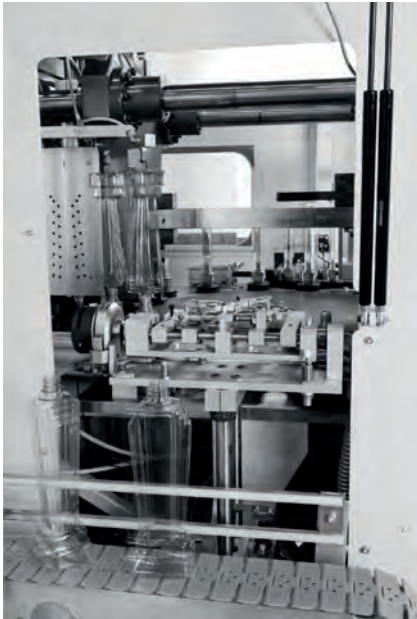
One electric servo drives all moulds on this machine. Photo courtesy of W. Amsler Equipment Inc.
